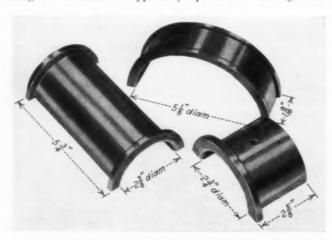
LEADED-BRONZE AUTOMOTIVE-TYPE BEARINGS USED IN INDUSTRIAL MACHINERY
